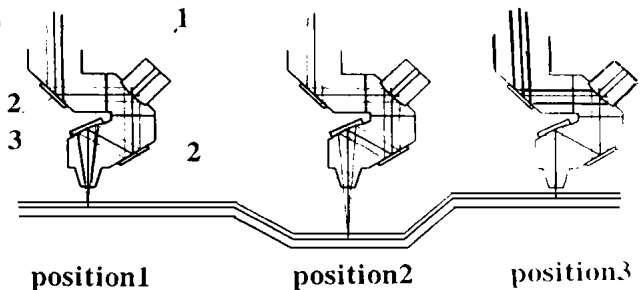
Three dimension laser welding with adaptive optics
